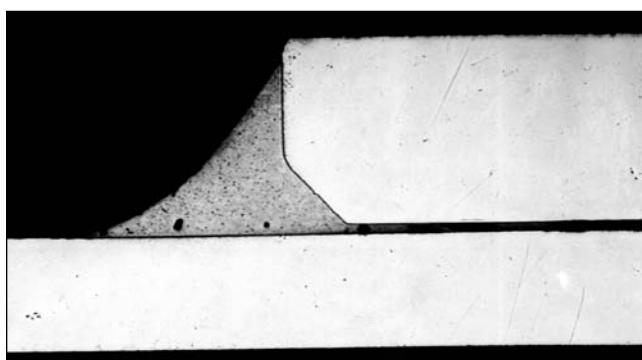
Void under the Filler Metal Fillet in a Brazed Copper Lap Joint
